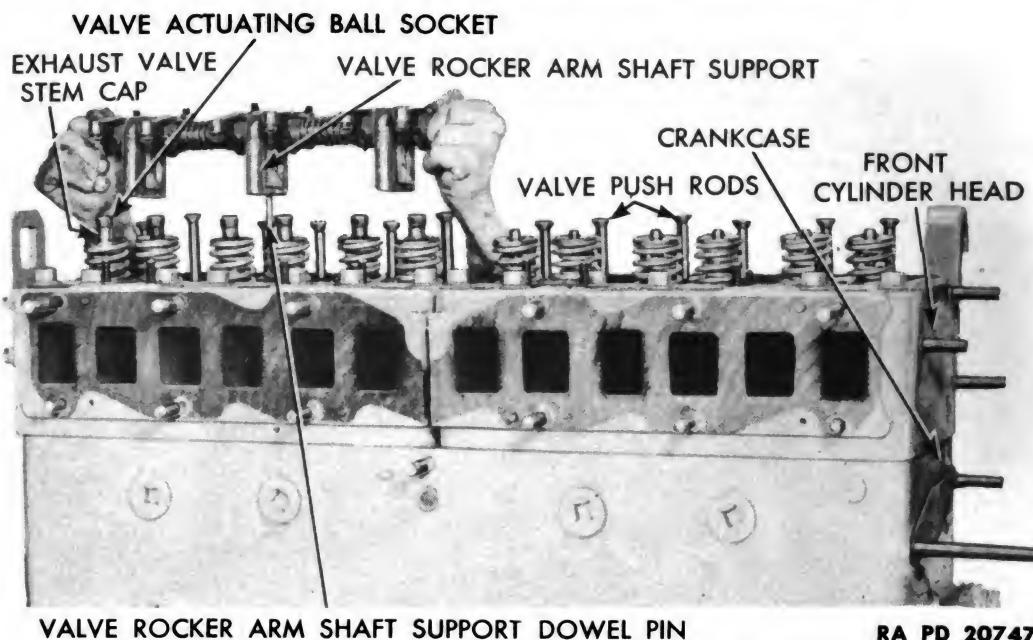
Removing Valve Rocker Arm Shaft Assembly
